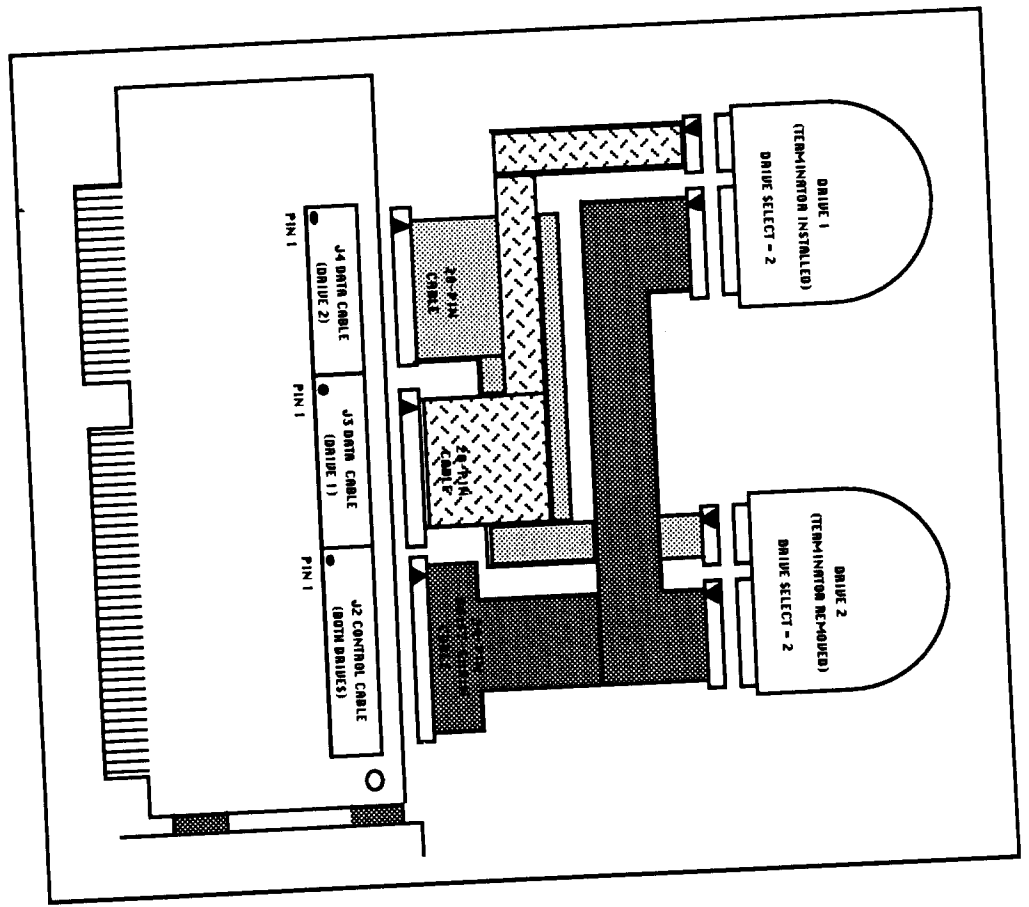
ACB-2372 CONTROLLER AND DRIVE CABLING-TWISTED CABLE (HARD DISK CABLES)
